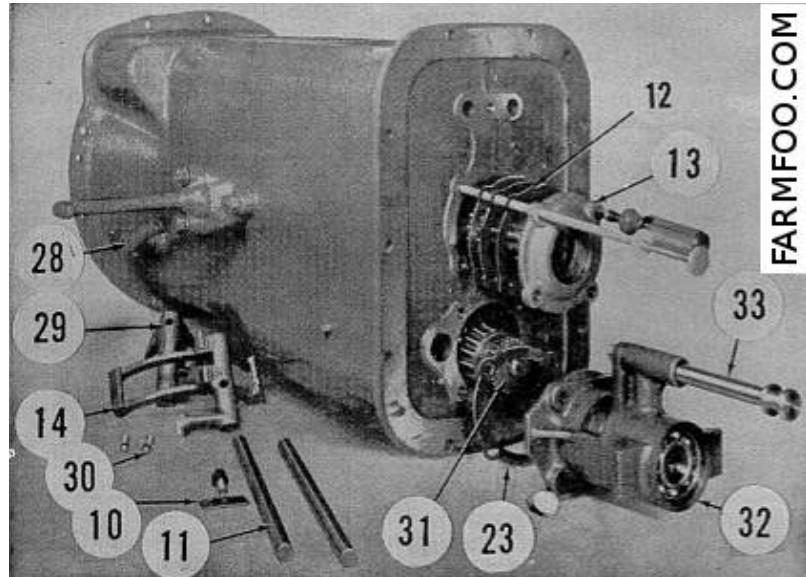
Rear end view of 2N-9N transmission showing bearing support and PTO shifter detached from end wall.
